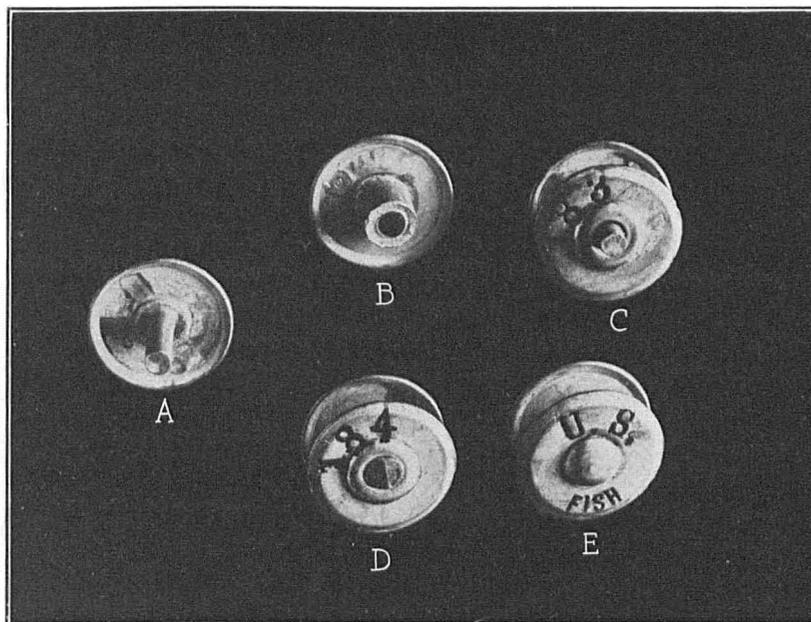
The two pieces of the marking button are shown in A and B, the former especially arranged to show the rivet, the latter to show the shaft. In C the two pieces are shown put together but not riveted. In D the parts are riveted together, and in E the converse side is figured.
